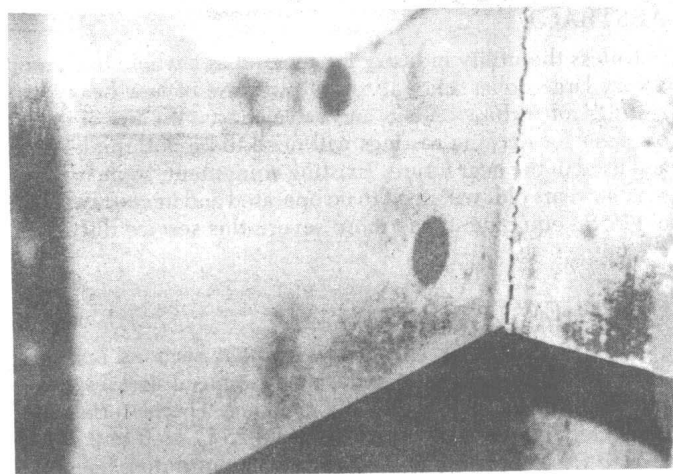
View of Turbine Shell Casting Illustrating Sharp Internal Radius.
